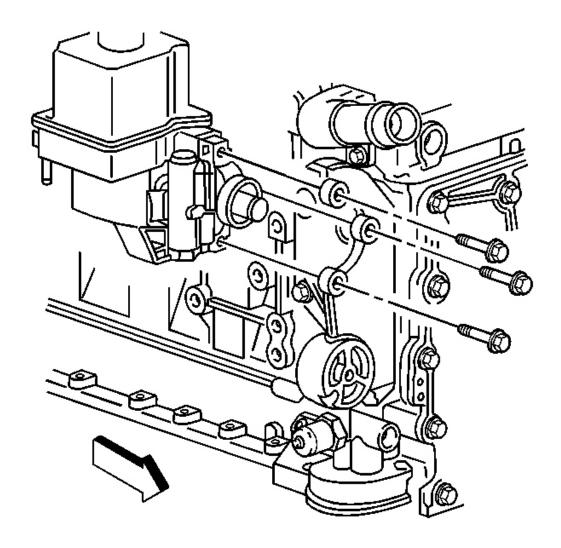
View Of Power Steering Pump Bolts Courtesy of GENERAL MOTORS CORP.
